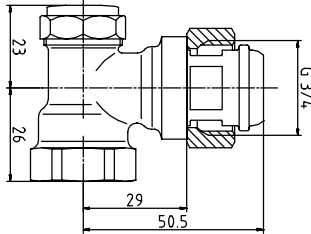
Angle with 1/2" internal to 3/4" internal thread
